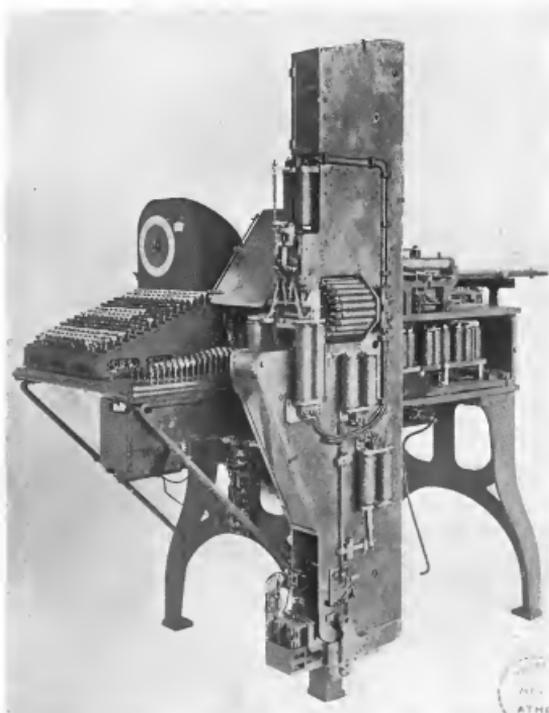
Graphotype (new model) composing and casting machine; view of right-hand side from the front.
